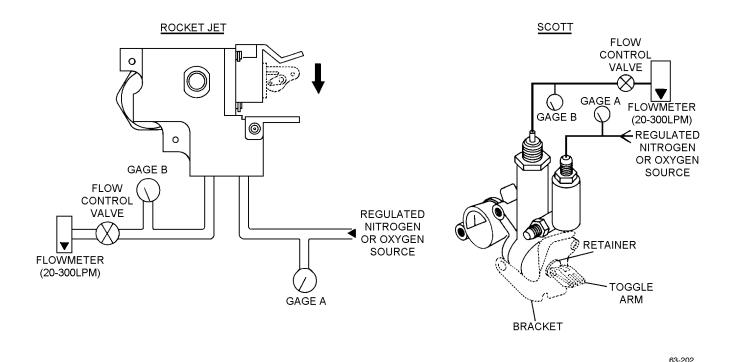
(Rocket Jet, Scott Only) Reducer/Manifold Assembly Test
